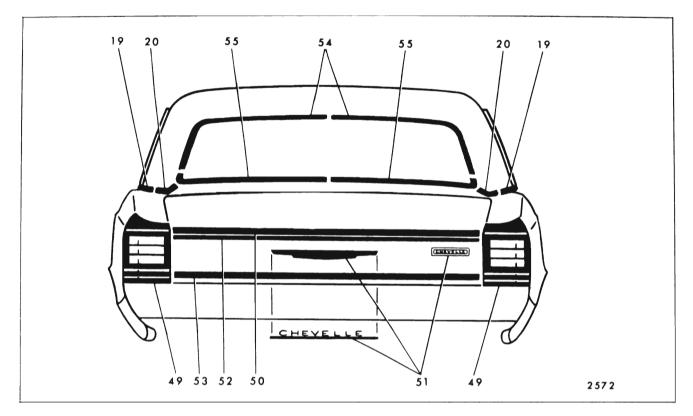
Chevrolet 13200-13400-13600 Styles (Except 35 Styles)
